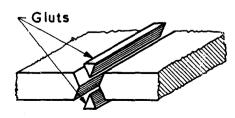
DOUBLE-GLUT BUTT JOINT (BEFORE FORGING)
